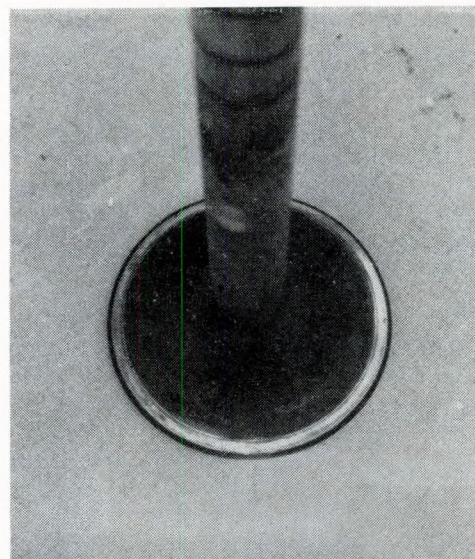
Exhaust valve in Fig. 12 after rubbing with emery paper showing the seat to be in perfect condition
